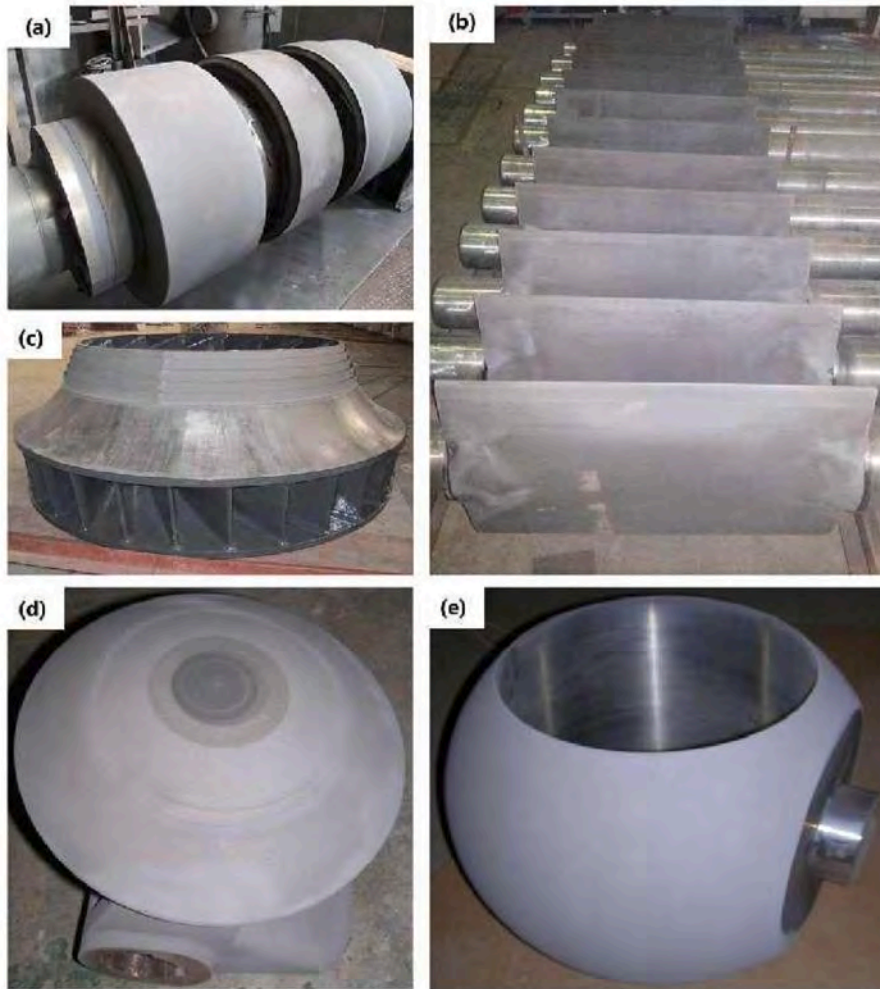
Industrial applications of sprayed components: (a) rotor spindle for gas turbine engine; (b) guide vane for hydropower stations; (c) turning wheel; (d, e) ball valve and its spool.
